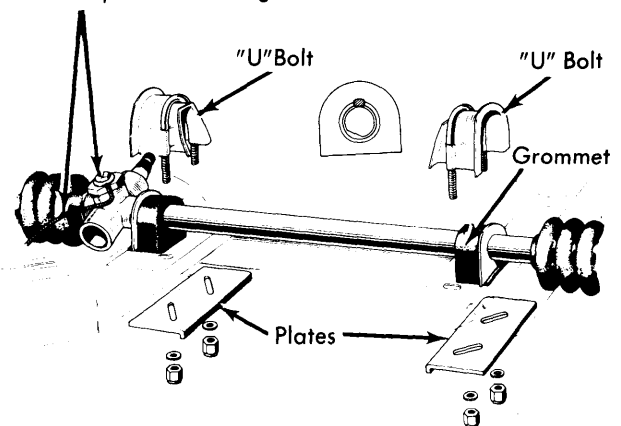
Reassembly of Rack Rubber Grommets (TR6 and Spitfire)
